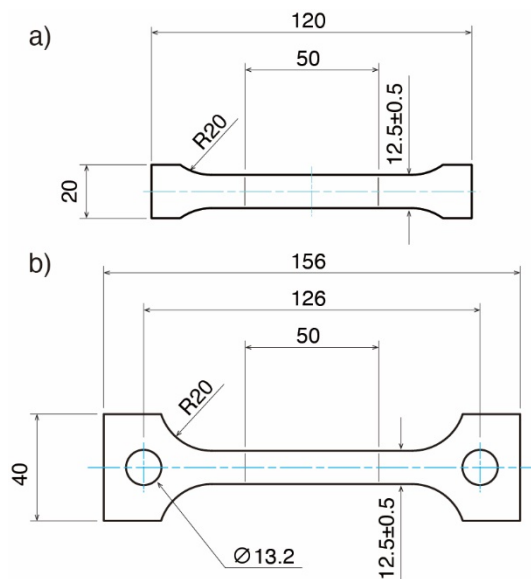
Tensile testing specimen (sheet type, JIS Z 2241 13B) [5]. a) for RT. b) for LHeT.
